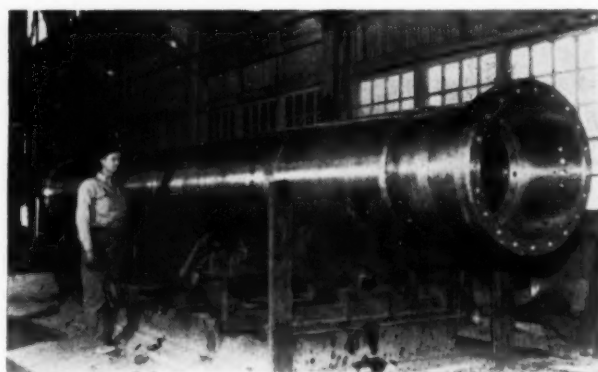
VIEW OF COMPLETELY FABRICATED AND MACHINED 25 PER CENT CHROME, 20 PER CENT NICKEL STAINLESS-STEEL RETORT 27 FT 6 IN. LONG
